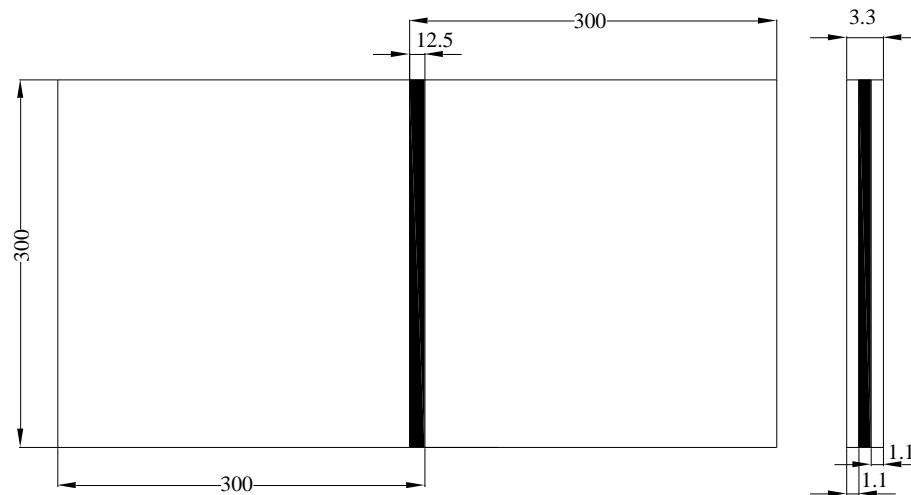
Geometric dimensions (in mm) of the adhesive bonded plates with lap joint
